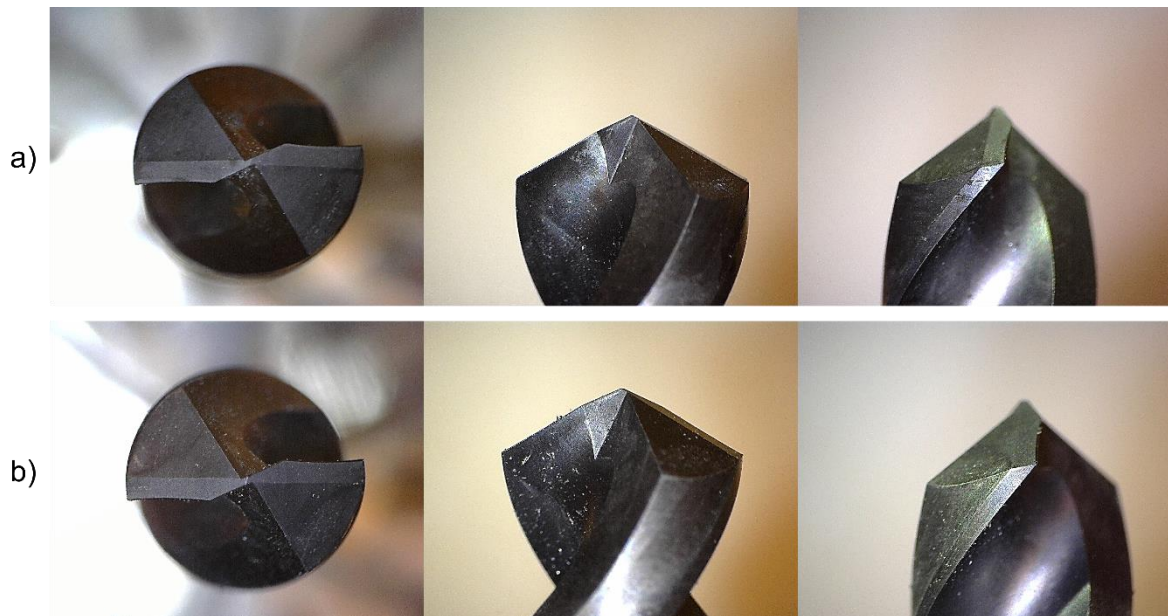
Wear analysis of the cutting edges of the drilling tool 2 after drilling: (a) 15 holes and (b) 345 holes (feed – 0.05 mm/rev; cutting speed – 300 m/min) in the configuration type I.
